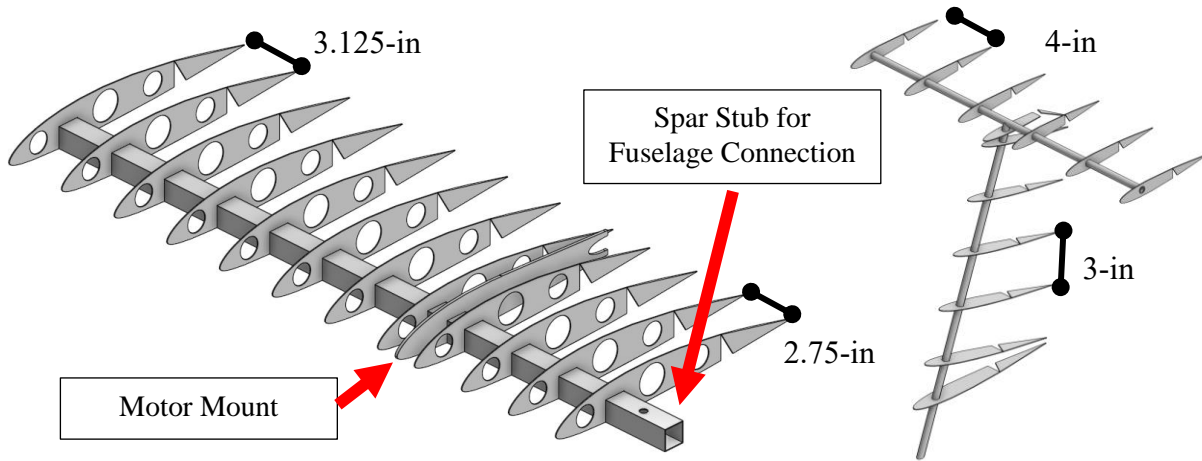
Spar-Rib Construction of Wing (left) and Tail (right)
